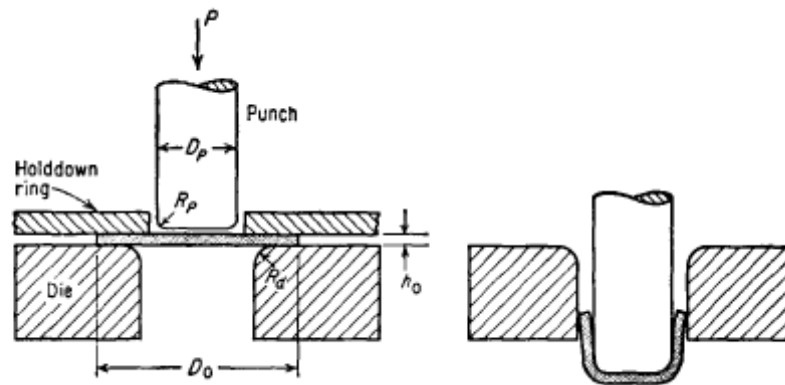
Principles involved in deep drawing of a blank sheet into a cup [55].
